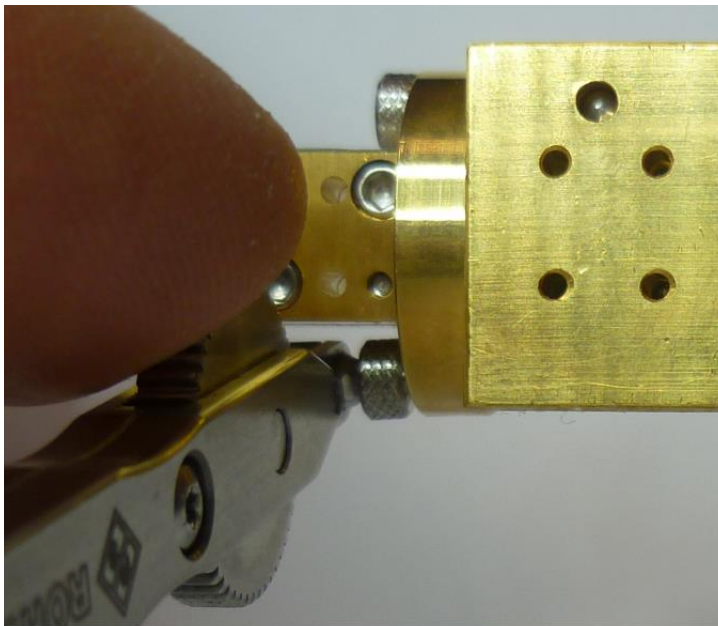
Angled hex ball driver R&S ZCAW (accessory)
